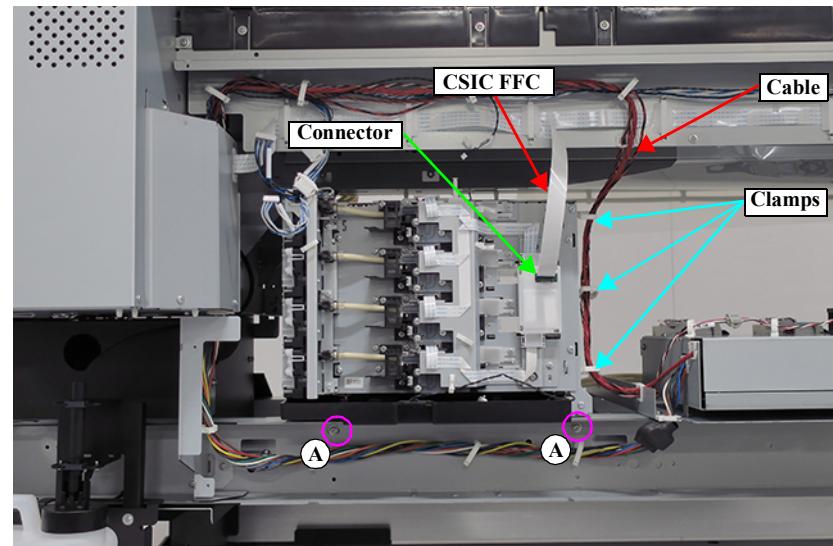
Removing the INK HOLDER RIGHT (2)
